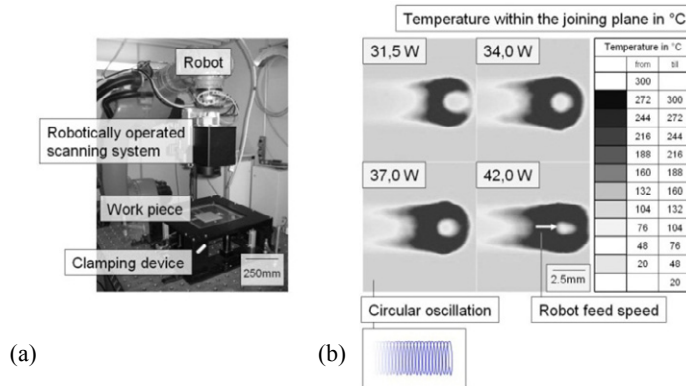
(a) Photograph of the system technology suitable for laser transmission welding with part adapted temperature fields; (b) infrared camera images monitored while welding with circular oscillation of the laser beam affected by the scanning system
